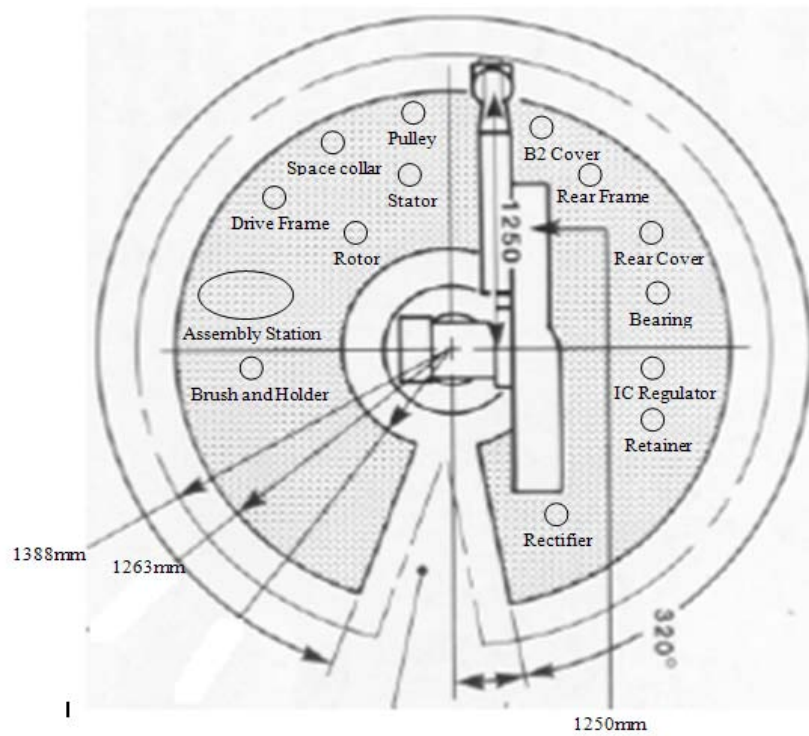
Workcell-2 for car alternator assembly with Puma-762 Robot
